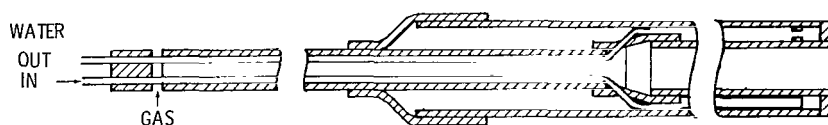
Cut-away view of water-cooled cathode; inside diameter, 1.3 centimeters; outside diameter, 2.9 centimeters.
